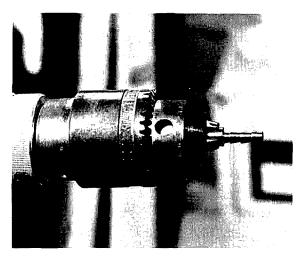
The Barb fitting after one end has been machined. The ribbed end is about to be machined.
